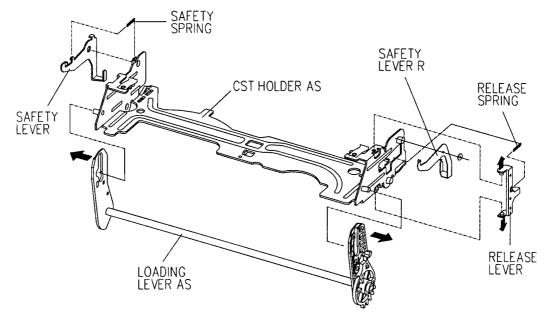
DISASSEMBLY OF THE CASSETTE HOLDER ASS'Y
